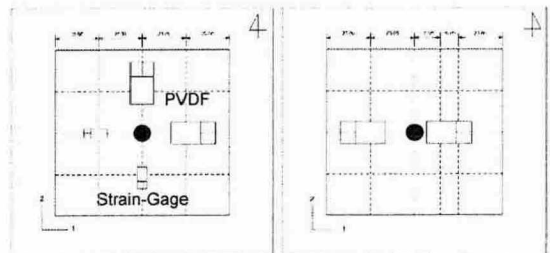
Dimensions of specimen and the position of sensors on front and rear surface
